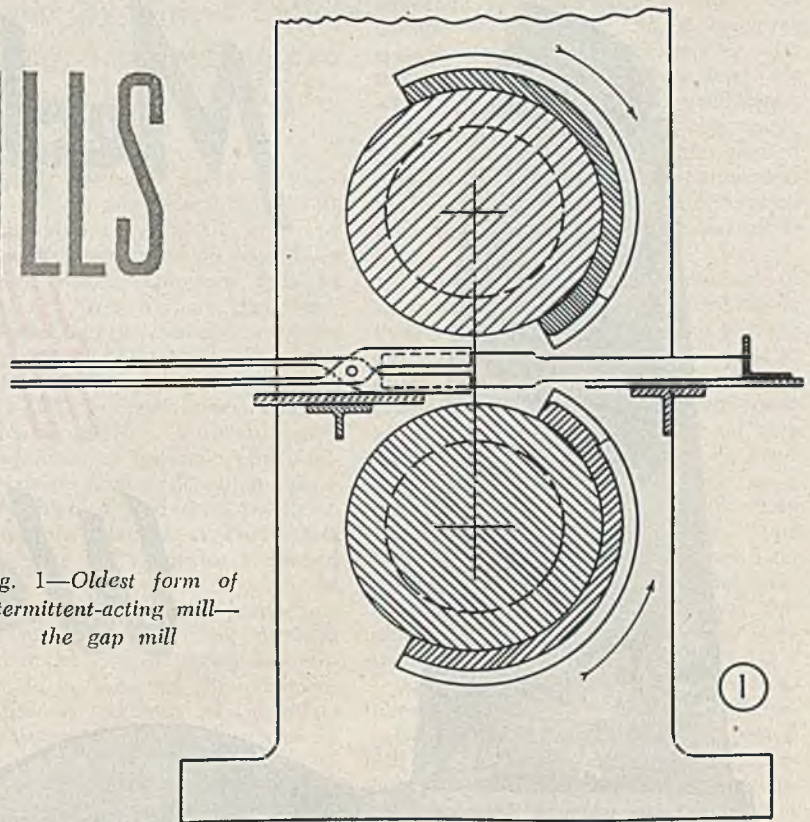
Oldest form of intermittent-acting mill—the gap mill
